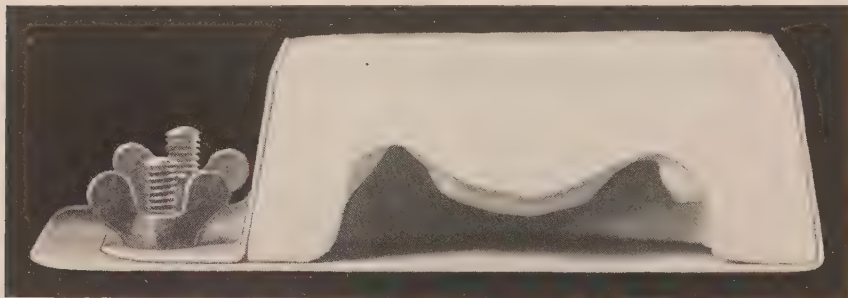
Portion of metal matrix employed to complete mould for metal die.
